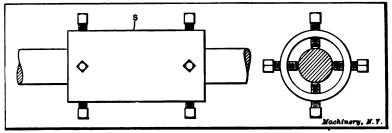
Cat-head which is sometimes used as Bearing for Steadyrest
